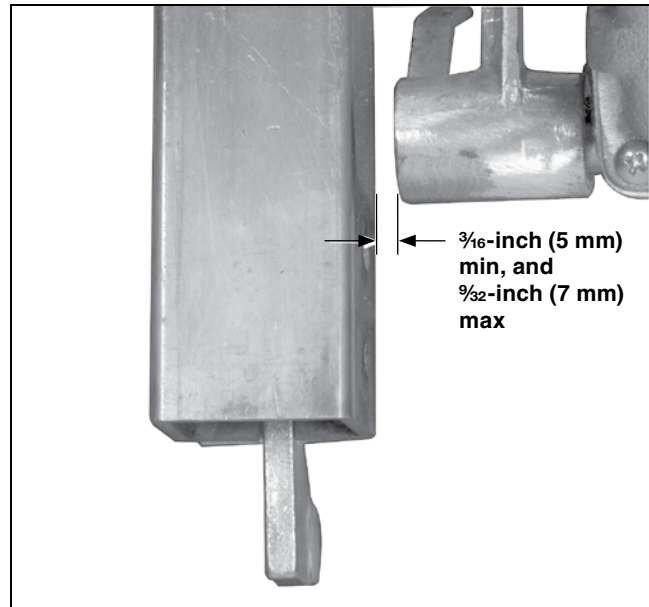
Verifying the gap between the end of the interrupter-lever shaft and the blade assembly.
